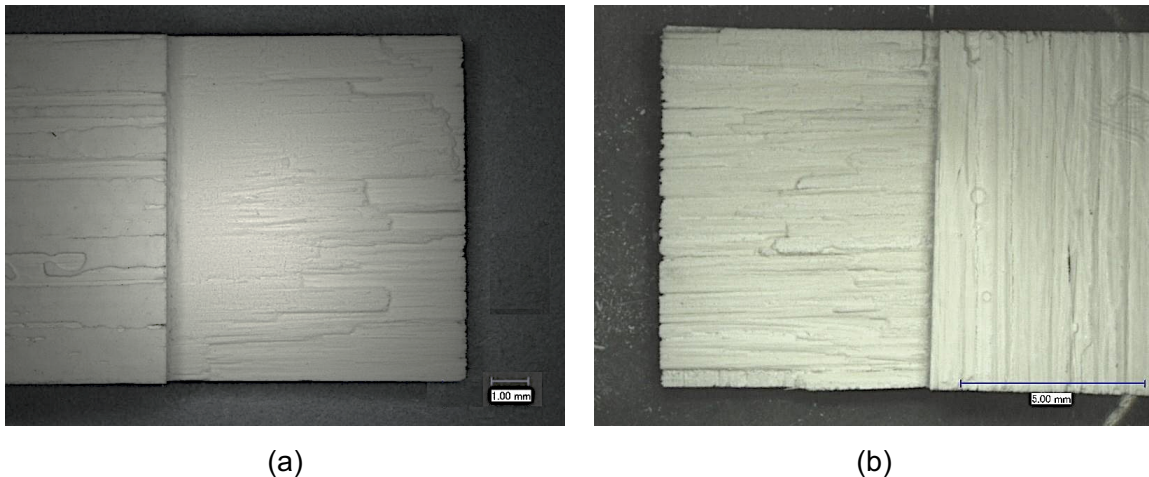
Fracture surfaces of ceramic matrix composites with (a) mullite filler and with (b) alumina filler after compression shear test. Scale bars indicate in (a) 1 mm and in (b) 5 mm.
